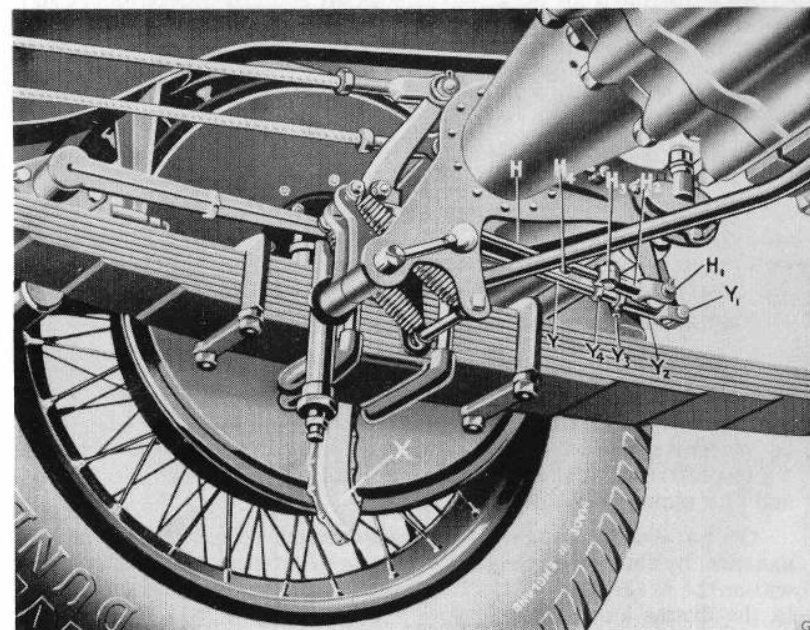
REAR WHEEL BRAKE ADJUSTMENT.
